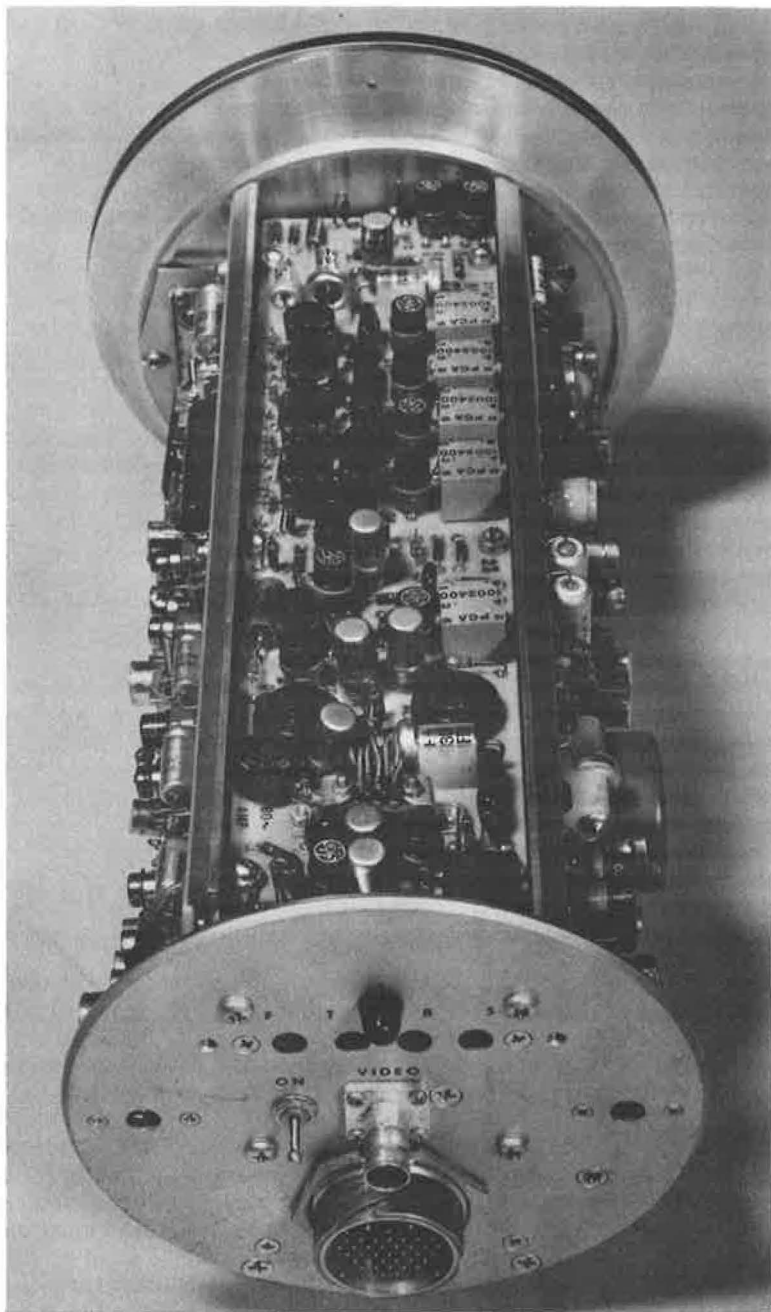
Camera with cover removed showing the three separate component boards (rear plate has provisions for input-outputs and field adjustments).
